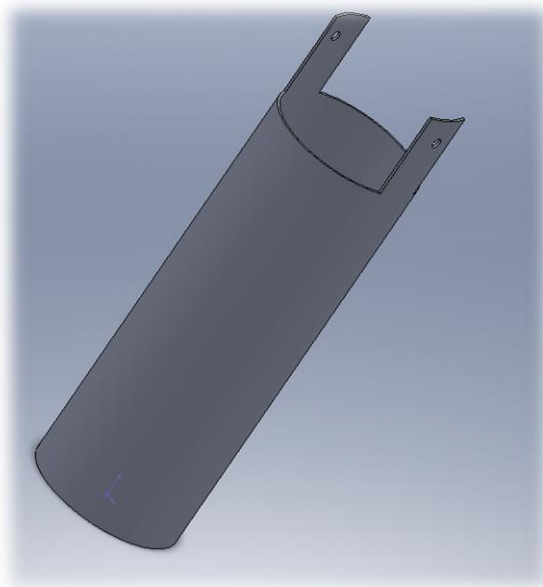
Joints of the snake-like robot head and tail (end) part
